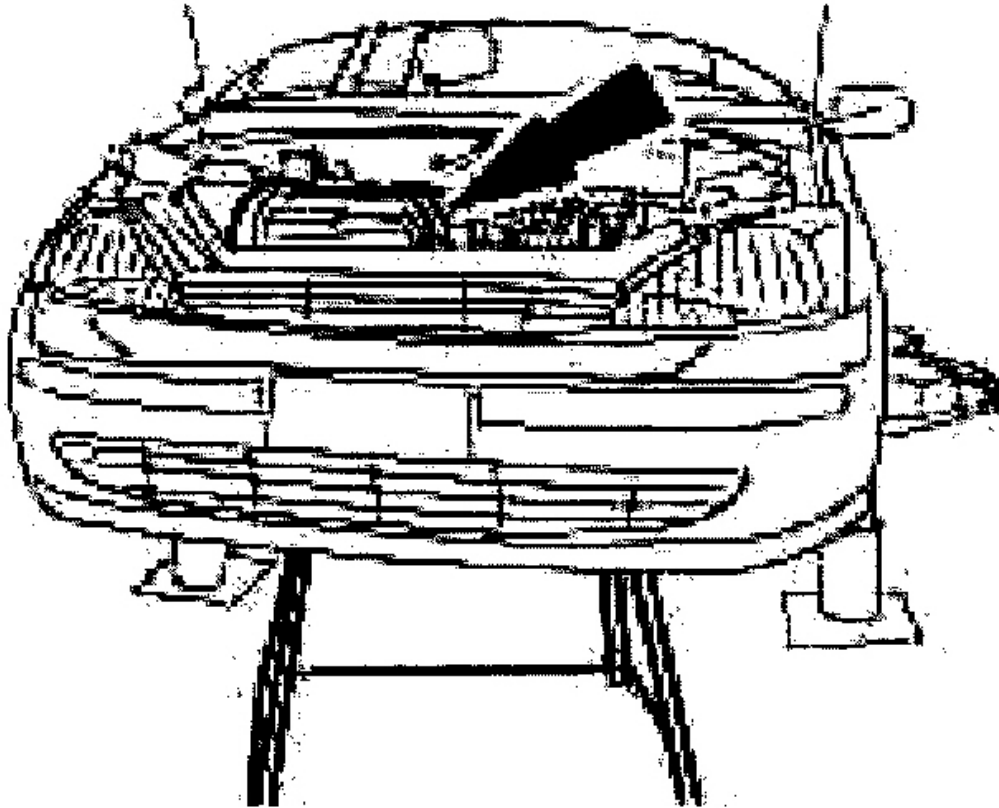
Detaching Left-Hand Halfshaft From Transaxle Using Special Tool
